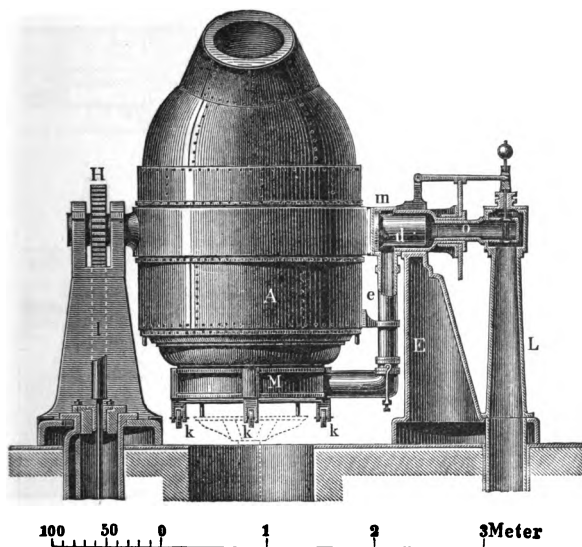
Bessemer Converter. A, Body of converter. M, Twyer box. k, k, Castors on which to remove twyer box. R, I, Standards for supporting the converter. m, Trunnion. H, Gearing for tipping the converter. L, o, d, e, Hollow blast-pipe.
